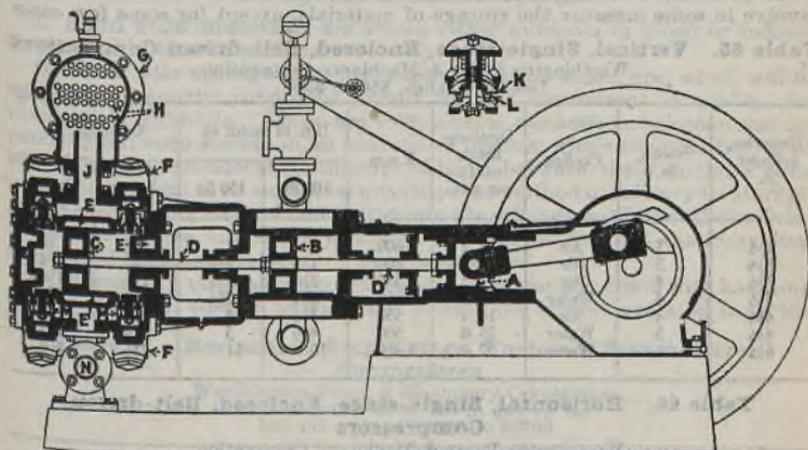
Section through the high-pressure cylinder of a two-stage steam-driven reciprocating air compressor.
